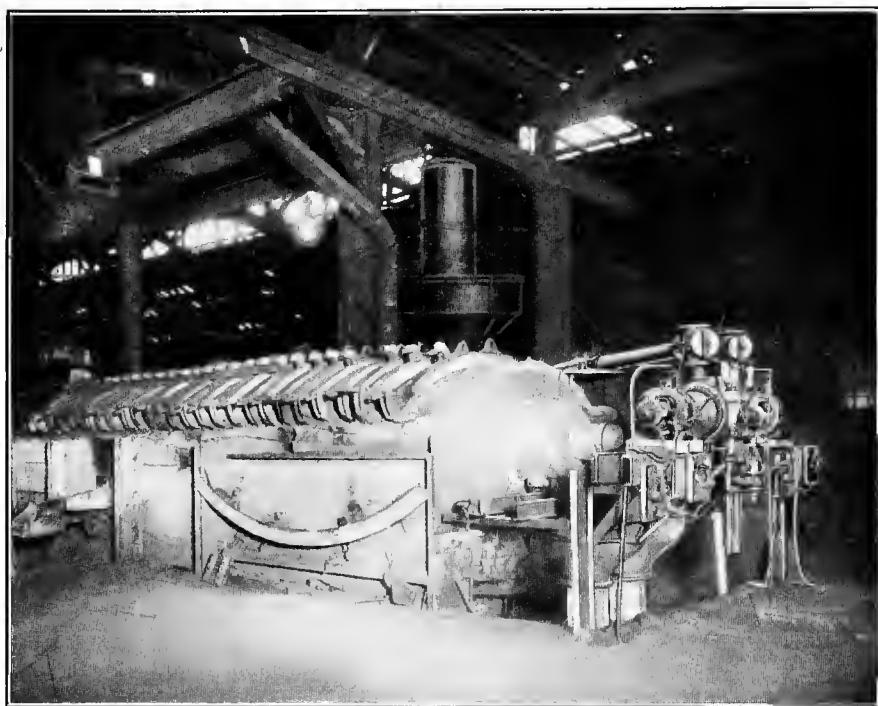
TYPE OF AMERICAN MALLEABLE IRON MELTING FURNACE ARRANGED FOR PULVERISED COAL FIRING.
